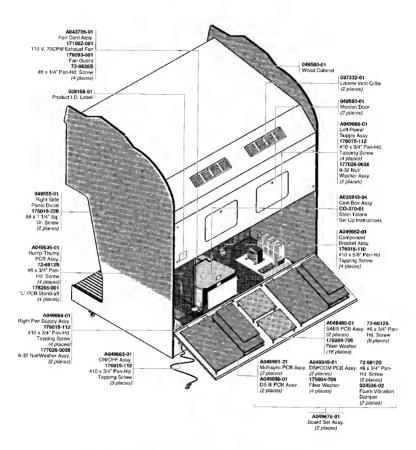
Cabinet-Mounted Assemblies, Rear View, Continued A049570-01 D
